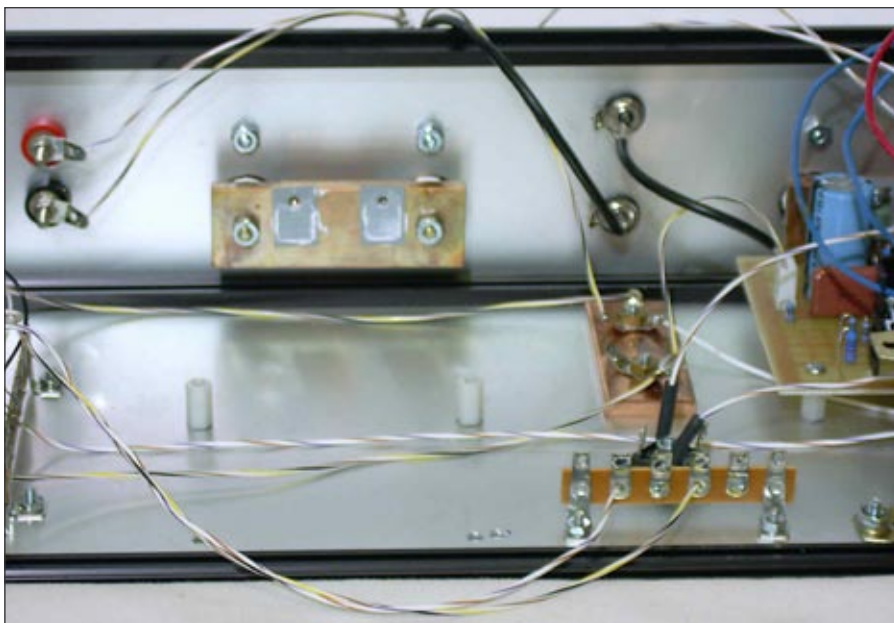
Detail showing copper bar used to heatsink Q4 and Q5. Use nylon spacers on all four corners of the circuit board to locate where to drill the Q4 and Q5 mounting holes (see text).
